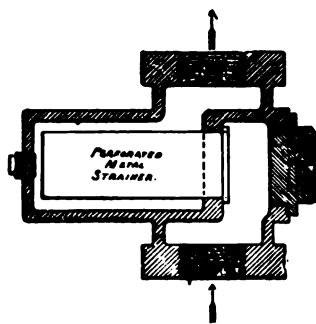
This is a simple form of a strainer in which the basket can be readily removed for cleaning.
